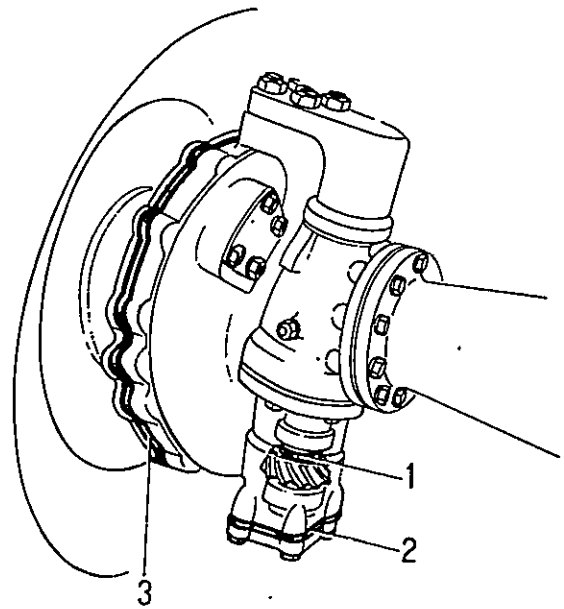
Adjustment and inspection of the backlash and the impression of the final drive bevel gears.
